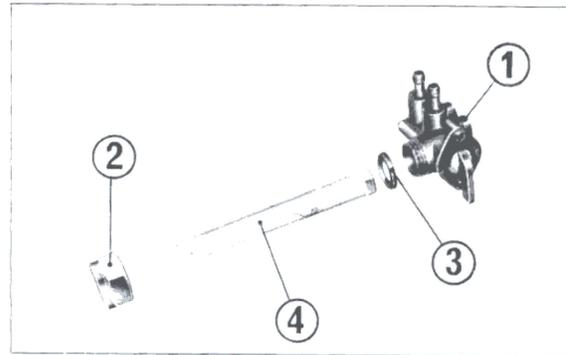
(1) Fuel cock (2) Fixing nut (3) Gasket (4) Fuel filter
